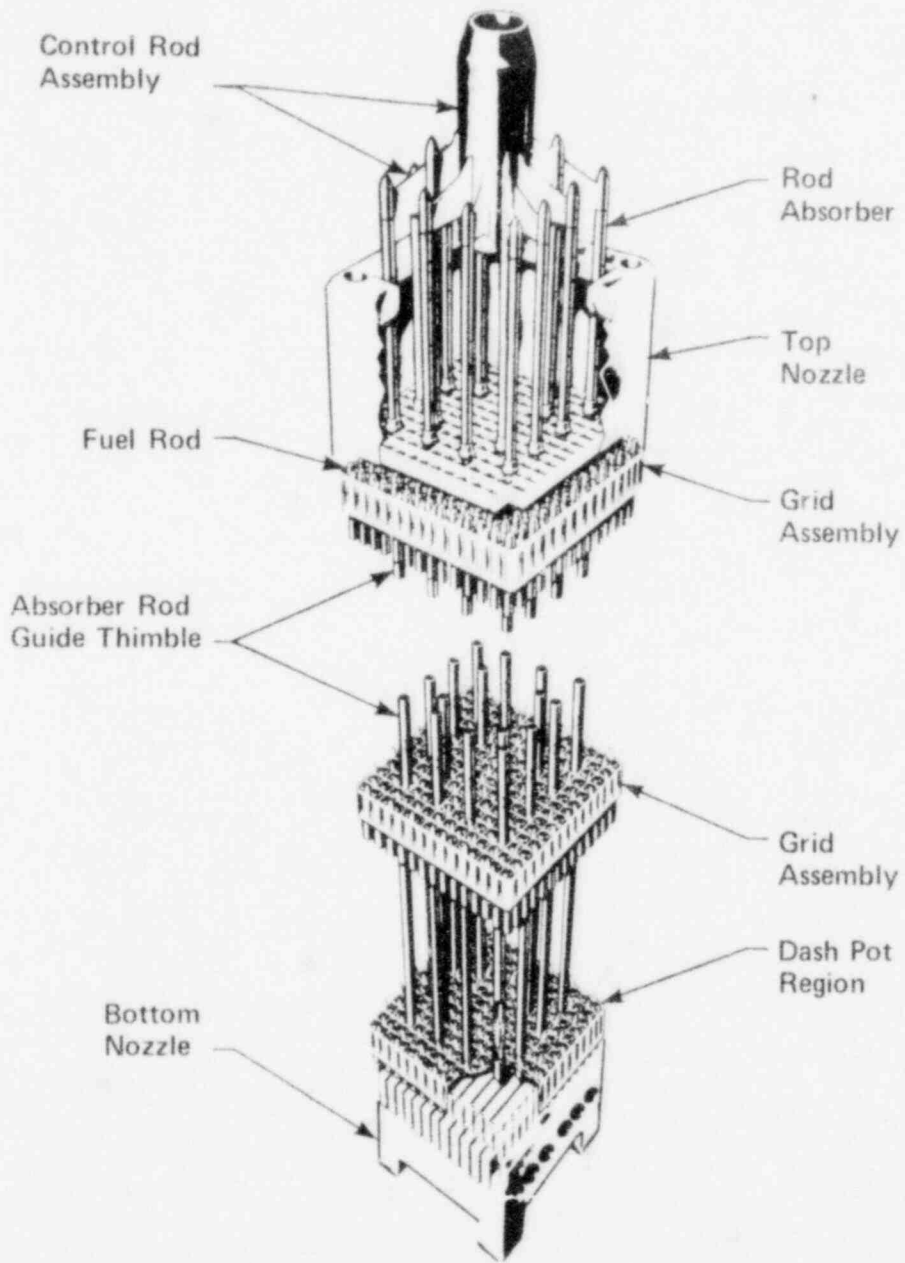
Cutaway of typical rod cluster control assembly inserted in fuel assembly.
